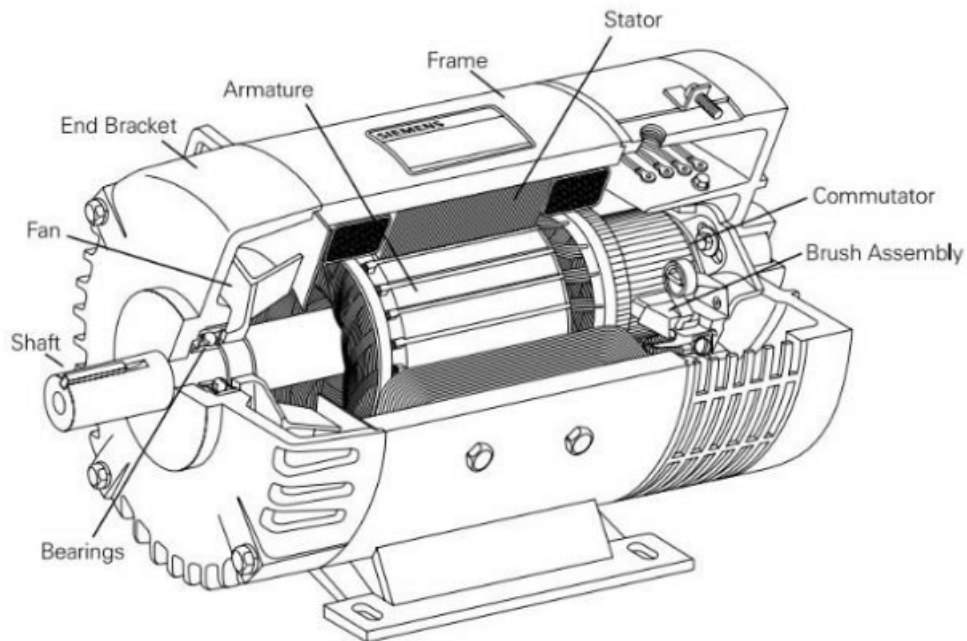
Assembly drawing of a general DC electric motor (Mohsen and Al-Sharkawy, 2017)
